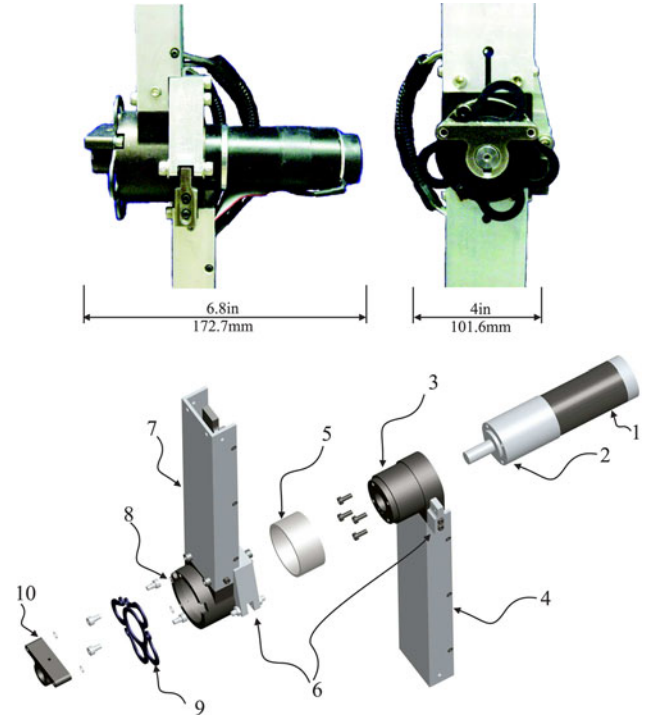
(Top) Knee joint on the robot, side and frontal views. (Bottom) CAD model—exploded view of the knee joint: 1) encoder; 2) actuation unit—motor and the gearhead; 3) inner bearing housing; 4) lower leg; 5) Teflon sleeve bearing; 6) hard stop at full knee extension; 7) upper leg; 8) external bearing housing; 9) elastic coupling; 10) connecting element.
